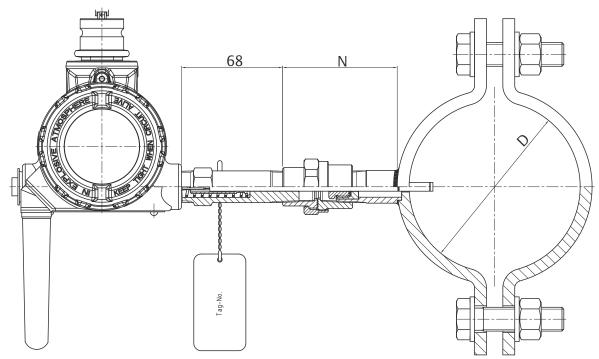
Pipe Clamp Sensor Assembly with Rosemount 648 Wireless Transmitter
